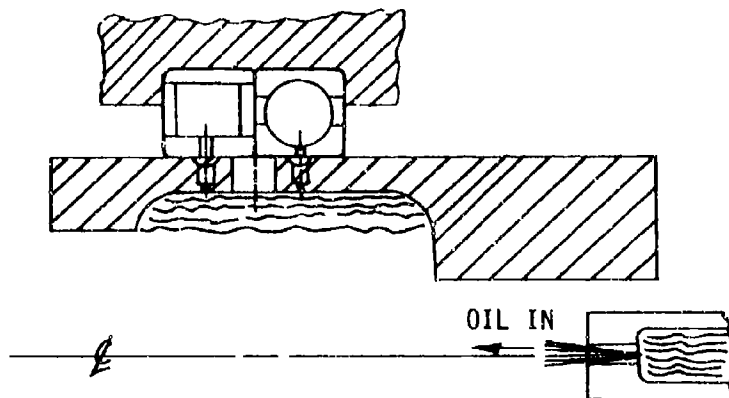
THROUGH-SHAFT BEARING LUBRICATION
